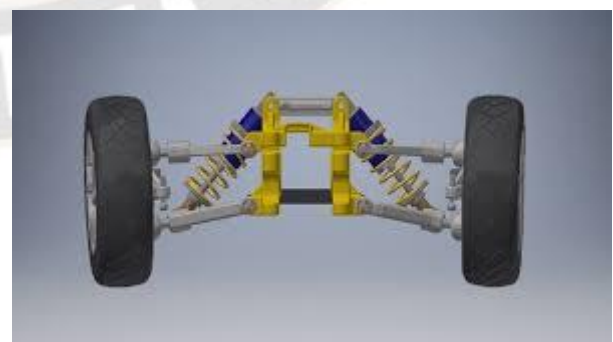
3D CAD Assembly of Double Wishbone Suspension
